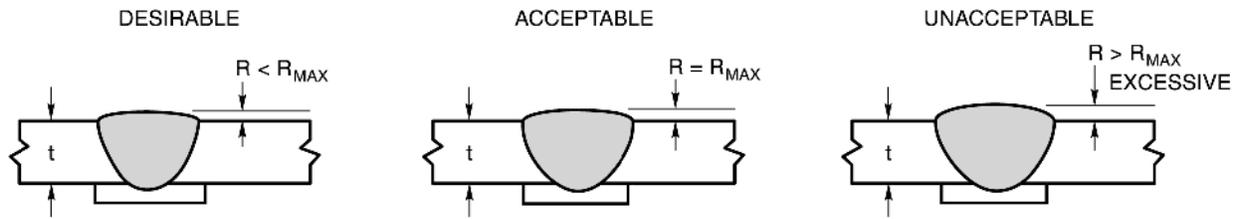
FIGURE A – WELD PROFILES FOR BUTT JOINT REQUIREMENTS (see Tables 2 and 3)
